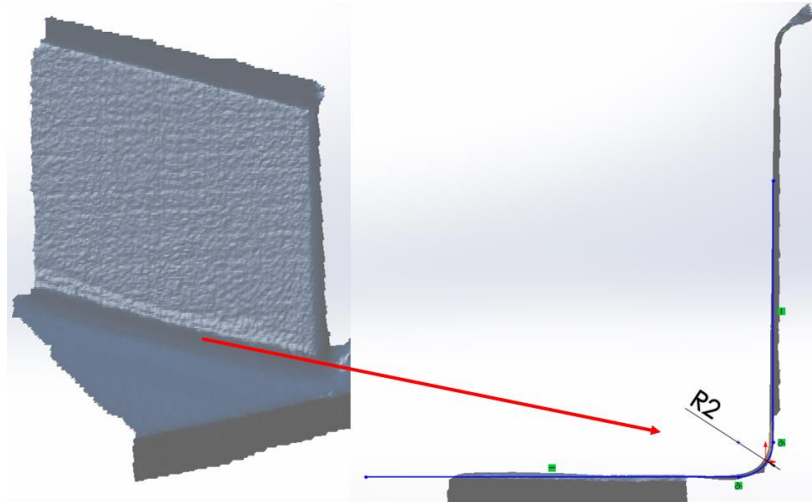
Imported mesh in Solidworks shows a 2mm fillet in the corner, side view on right
